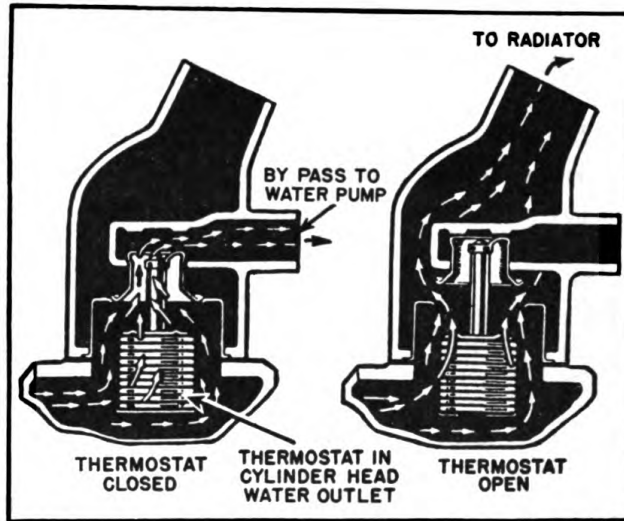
Left—thermostat valve closed, preventing water circulation through radiator ; right—valve open, permitting water to circulate completely through cooling system.
